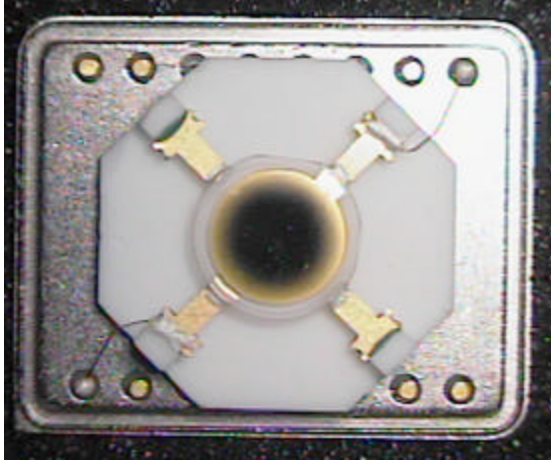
Mini-8mm Resistance Weld QSM Structure (flats).
